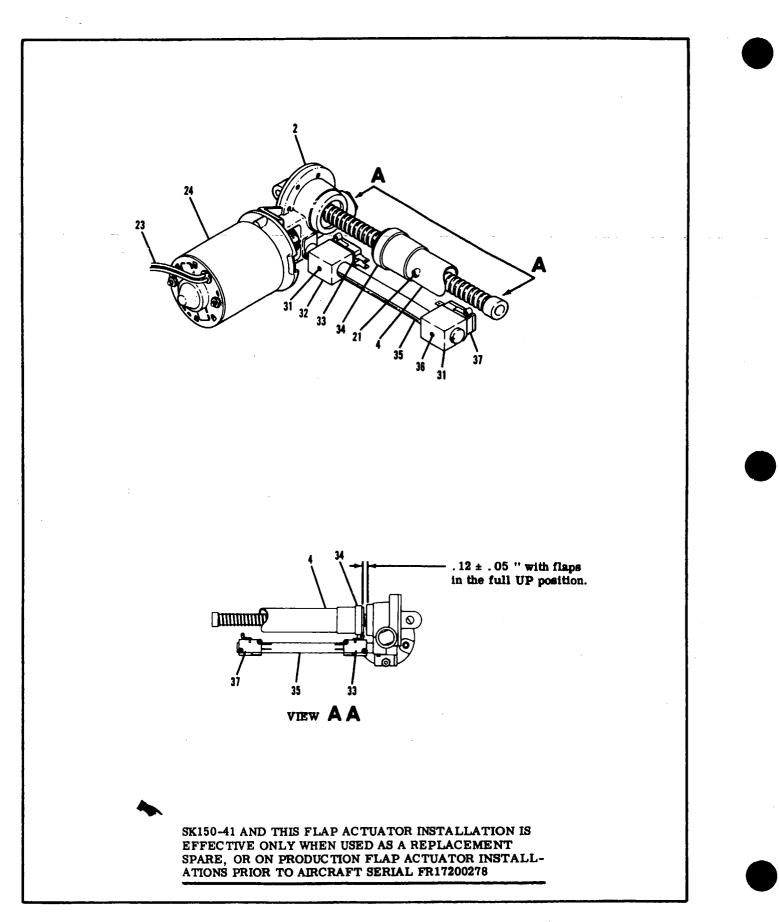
Flap Motor and Transmission Assembly (Sheet 3 of 3)
